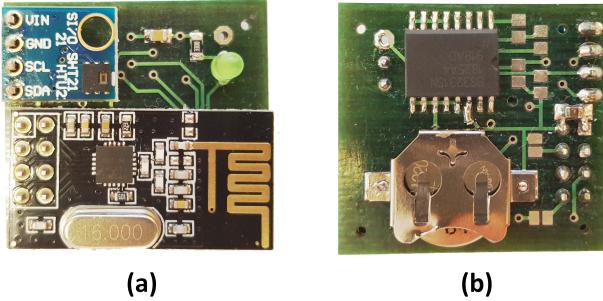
The PCB of the sensor node prototype. A nRF24L01+ and HTU21D PCB side (a) and battery and RTC PCB side (b).
